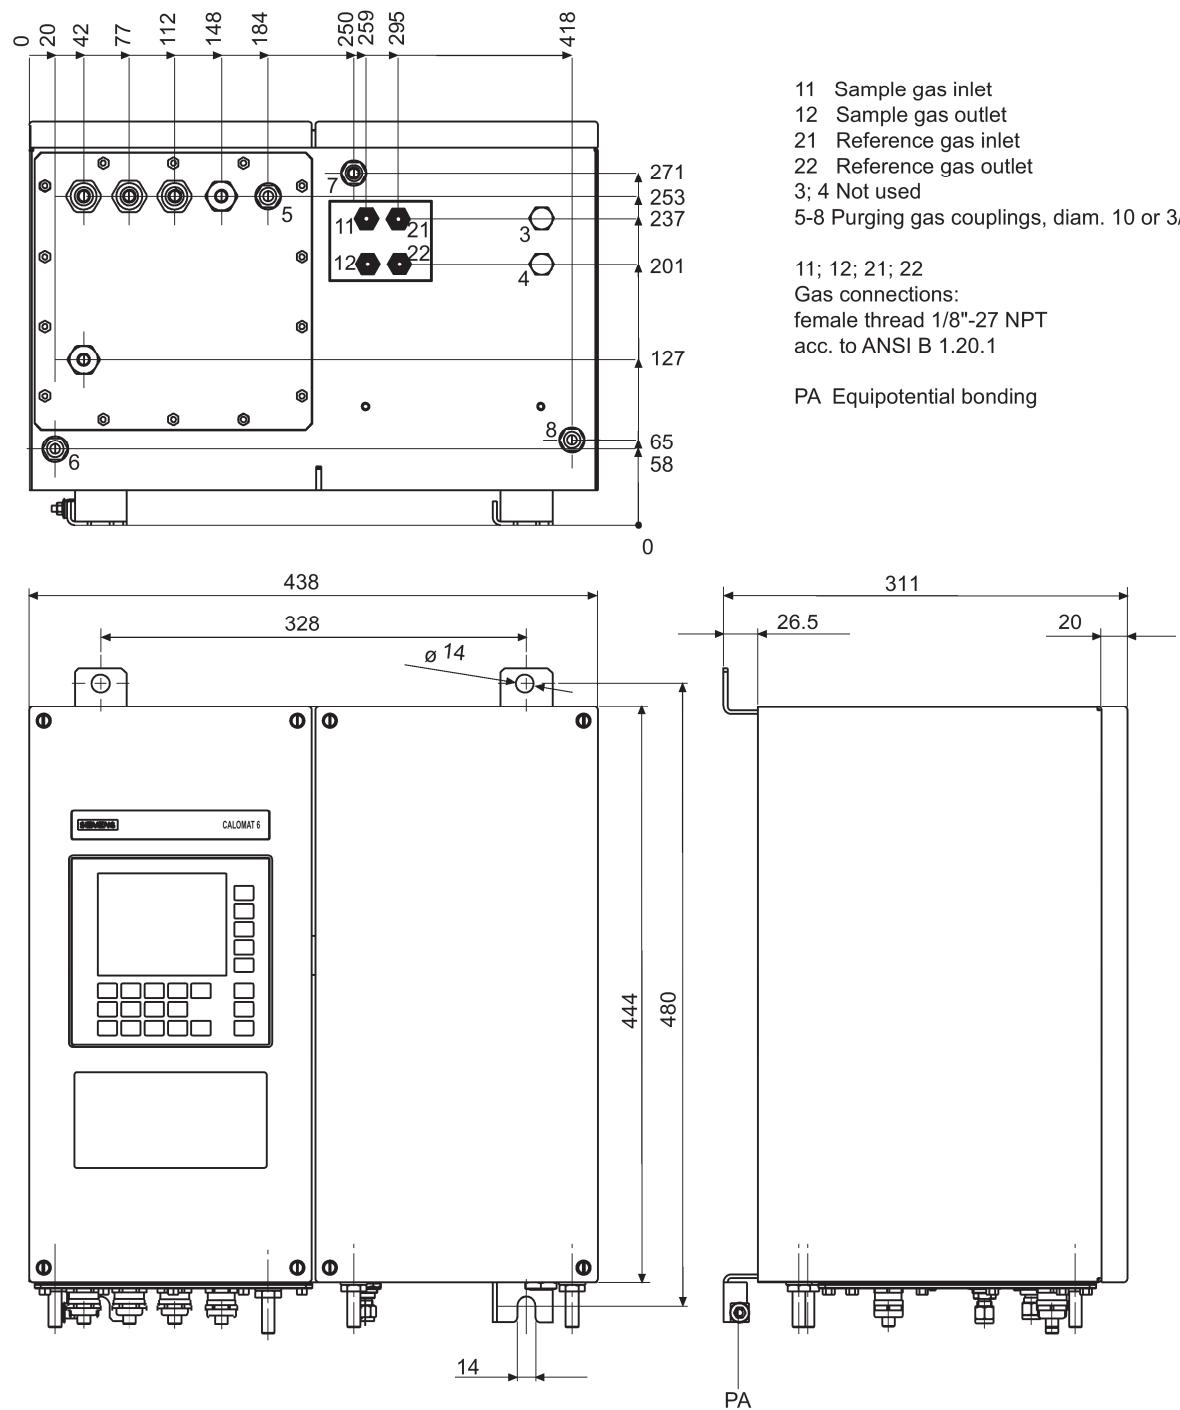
Dimensions for preparing installation (bottom view, front view and side view) of CALOMAT 62F
